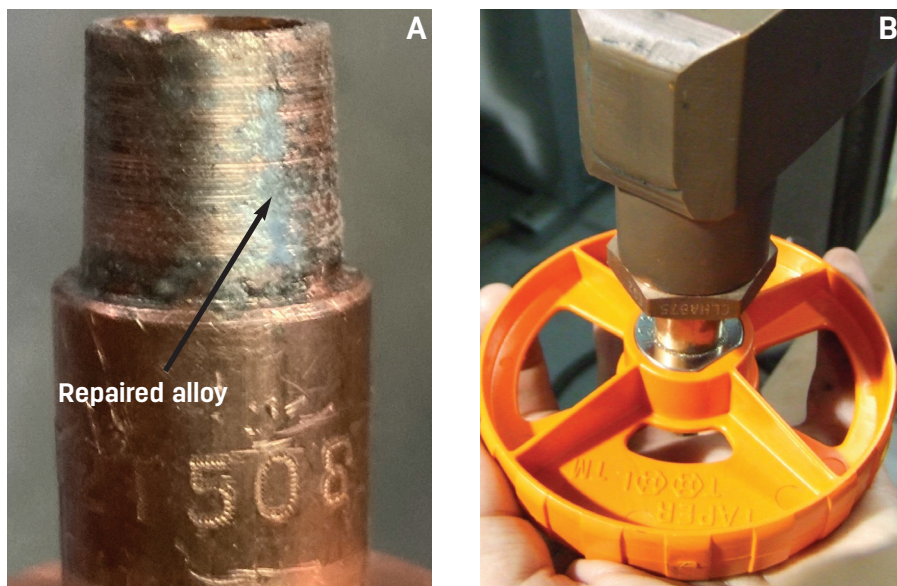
A — A repaired electrode shank; B — the Taper Tool. (Courtesy of Huys Industries.)
